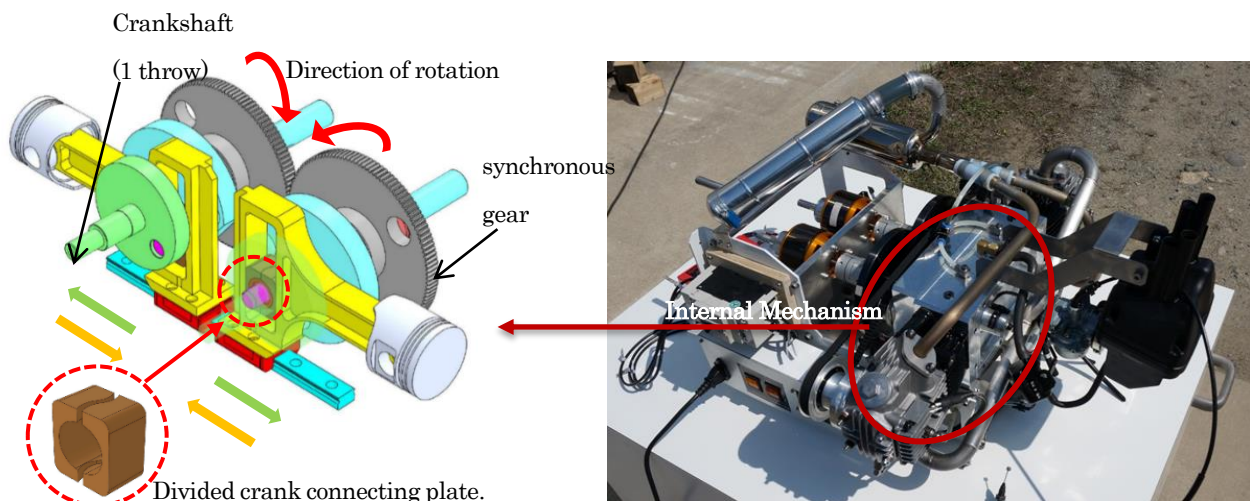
Oblique view of Z-Mechanism (Mirror arrangement type) and manufactured ICE
